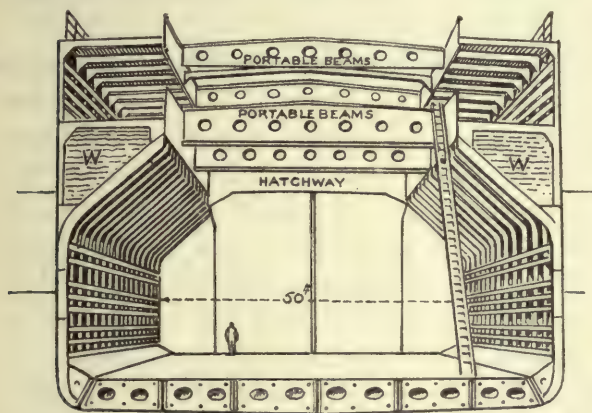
SECTION OF A CANTILEVER FRAMED SHIP WITH SIDE WATER-BALLAST TANKS, W W.
